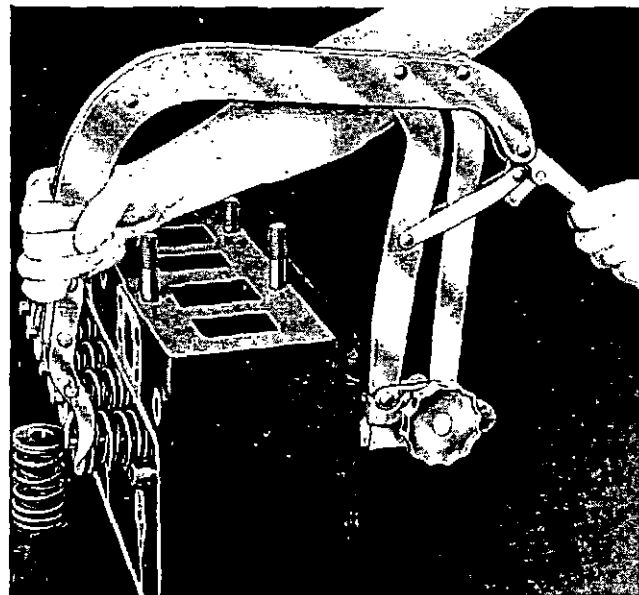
Removing Valve Springs with "C" Type Valve Spring Compressor
